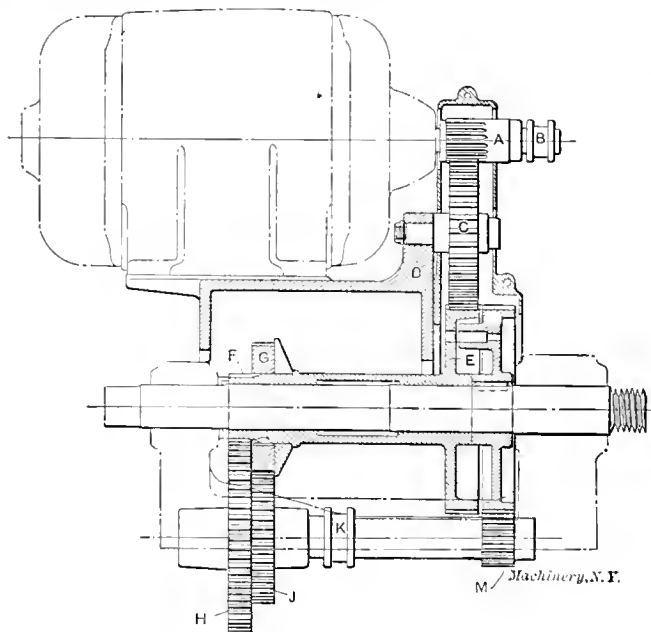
Diagram of the Drive of the Lathe shown in Fig. 1.
